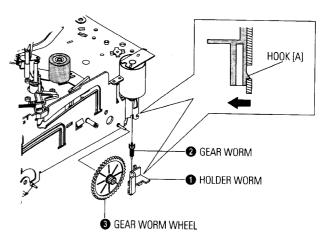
Holder Worm, Gear Worm, Gear Worm Wheel Removal
